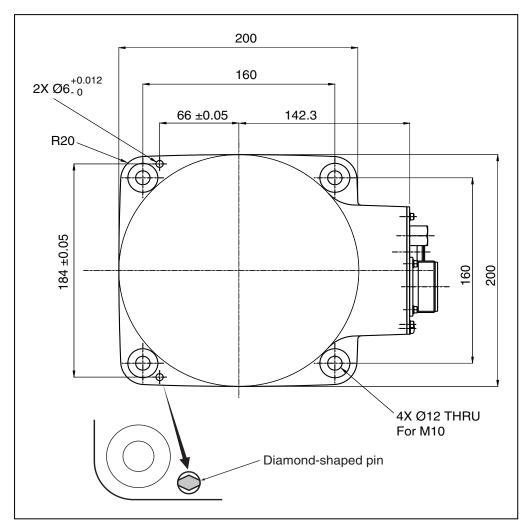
Mounting Hole Pattern for Viper Robot (units in mm)
